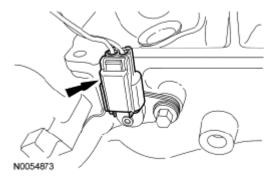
Locating RH Coil-On-Plug Electrical Connectors Courtesy of FORD MOTOR CO.
